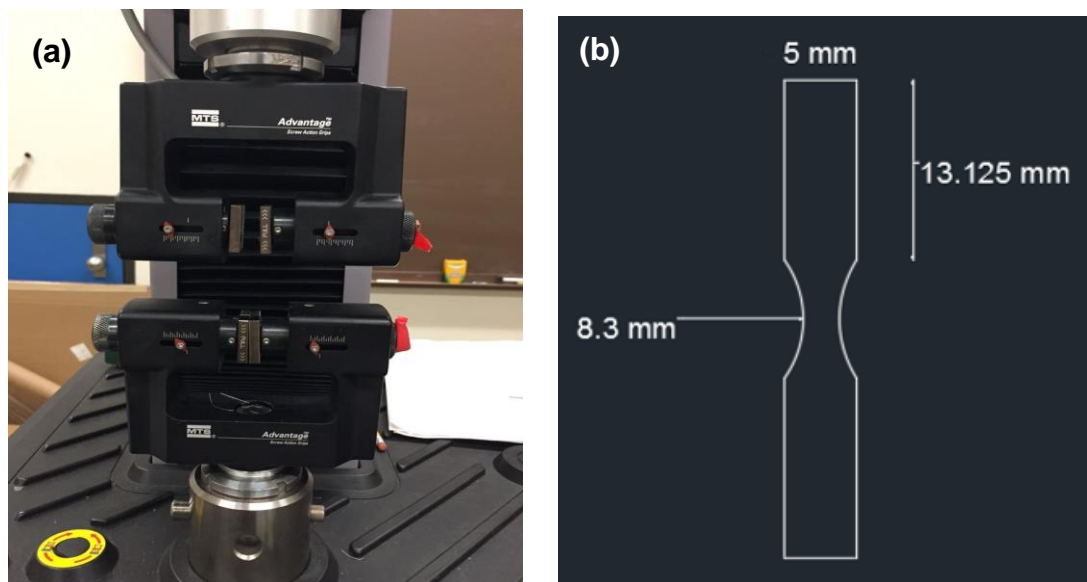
(a) Uniaxial tensile tester (b) Uniaxial tensile test specimen (AutoCAD 2016®)
